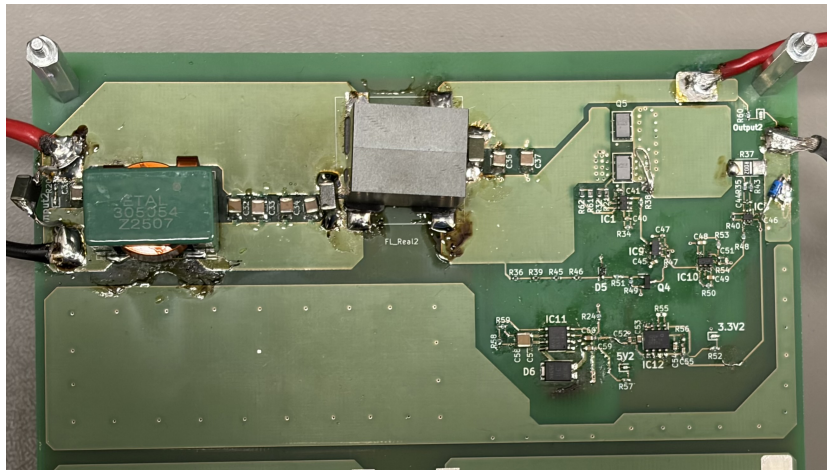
Assembled PCB prototype configured with two parallel GaN FETs.
